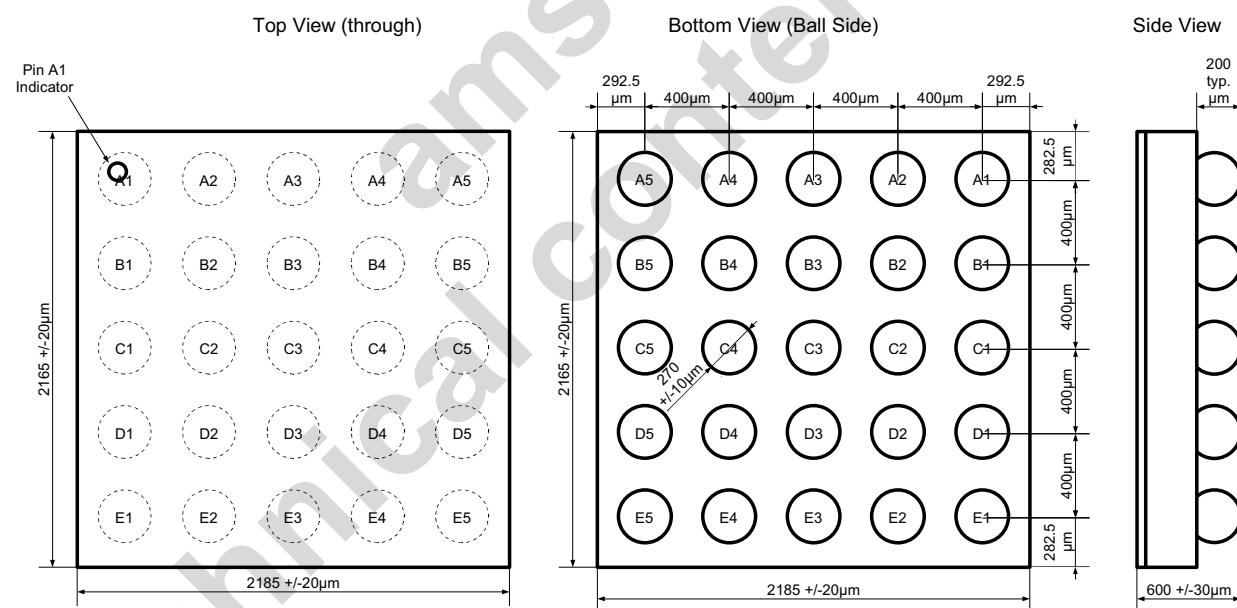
WL-CSP25 2.2x2.2x0.6mm 5x5 Balls Package Drawing
